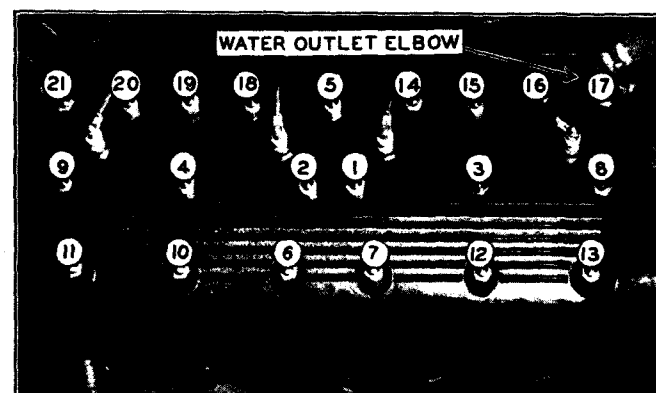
When installing the cylinder heads, tighten the nuts in the order shown above.
